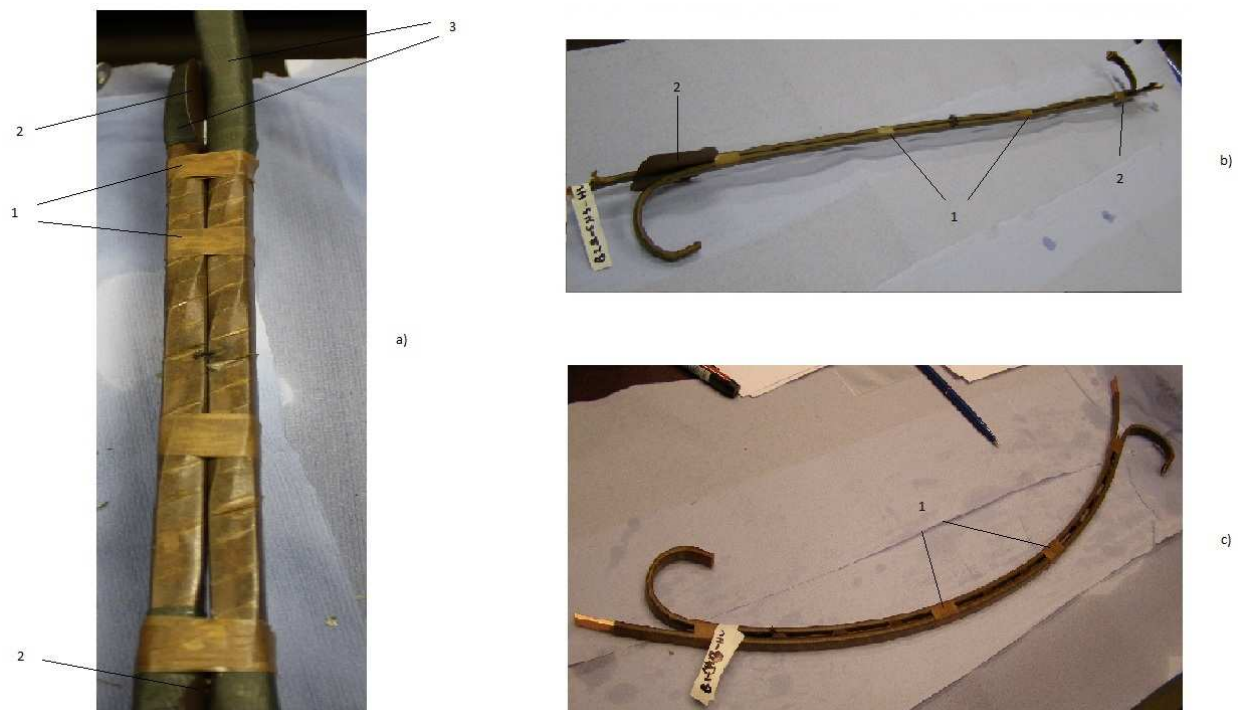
Types of winding samples: a) CTC type with extra insulation and small piece of board (2 and 3) at the bend side; b) straight test samples with thinner conductors; c) small angle bent test samples with thinner conductors.
